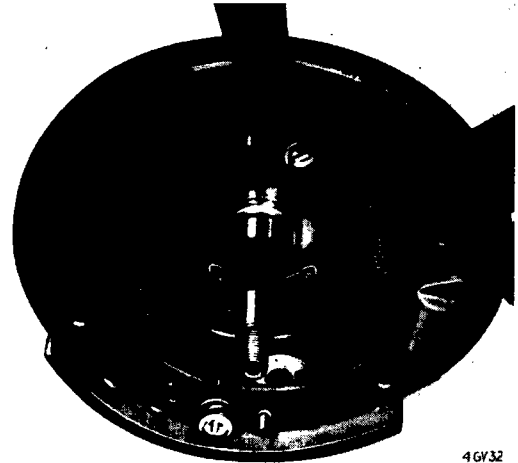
Locking tabs securing backing plate and steering arm bolts
